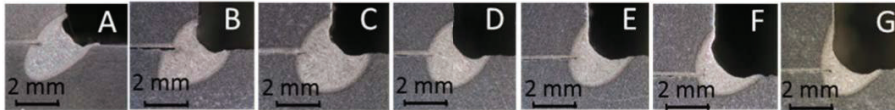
The cross-sections of the tracks formed while gradually shifting focal point position. Laser power 3 kW, beam angle 45° , welding speed 1.5 m/min. Focal point distance: A -20, B-25, C-30, D-35, E-40, F-45, G-50 mm.
